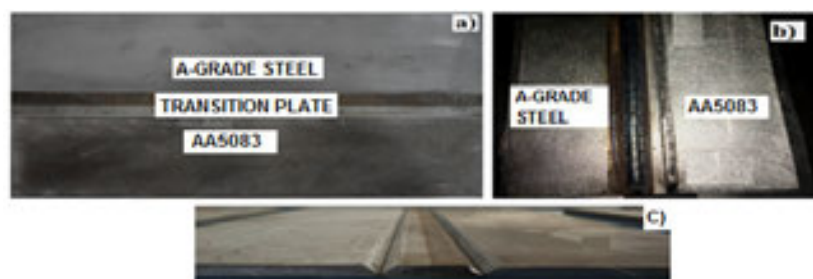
Macro view of a) A-grade steel, AA5083 aluminum alloy and aluminum-steel transition plate used in the study b) Weld groove prepared before welding and c) Grade-AA5083 couple joint by utilizing the transition plate by robotic GMAW method.
